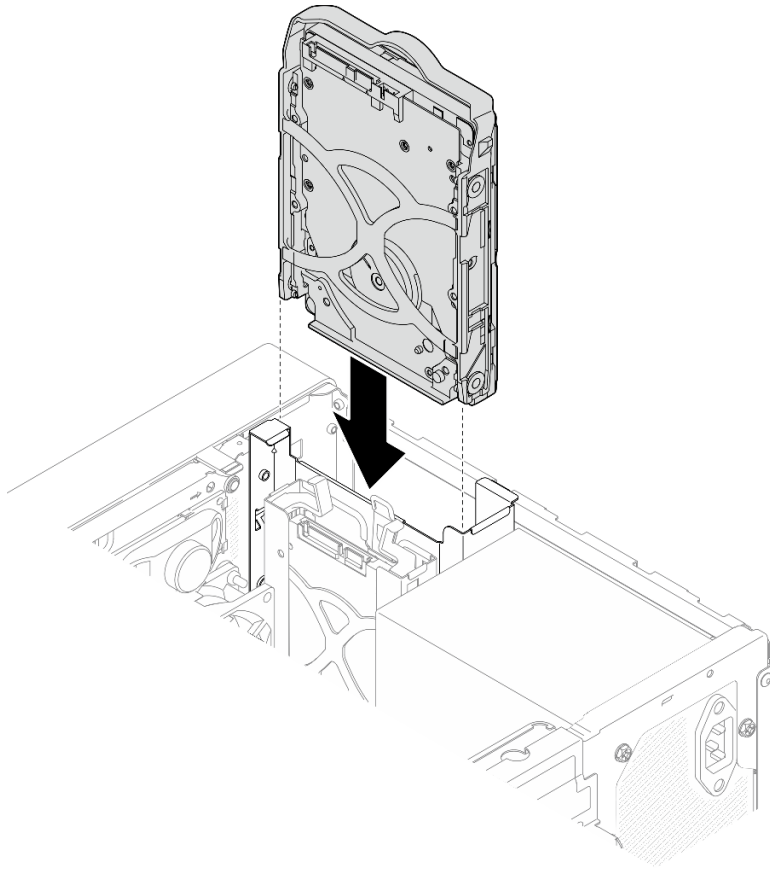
Installing the 3.5-inch drive assembly into drive bay 0
